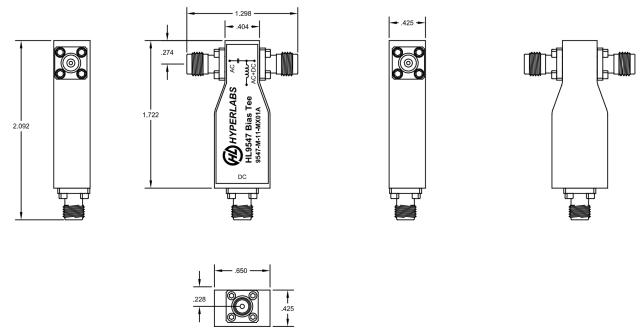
HL9547 with SMA DC bias port Mechanical Drawing
